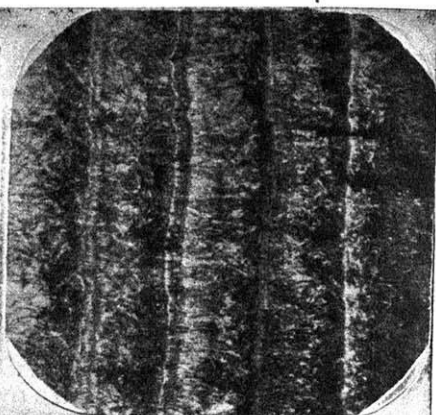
Fracture of Iron Cathode, magnified showing layers deposited each day.
